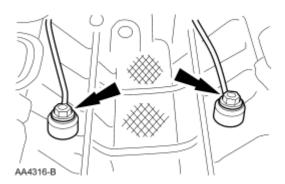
Knock Sensor Courtesy of FORD MOTOR CO.
